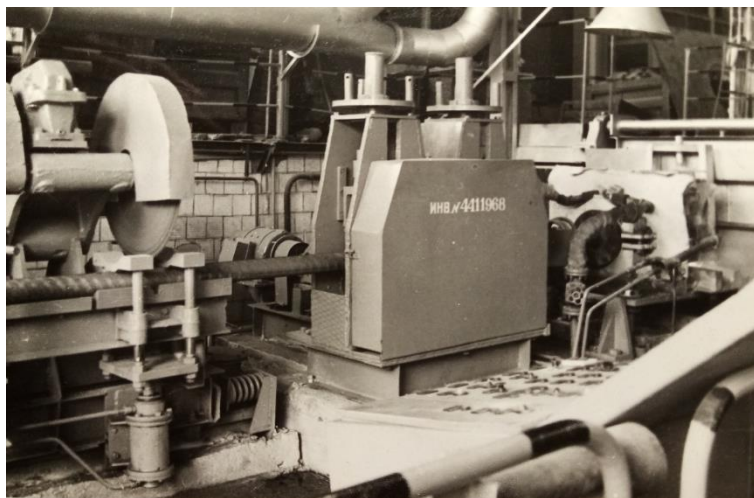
Horizontal continuous casting machine for copper alloy billets (Author's photo).
